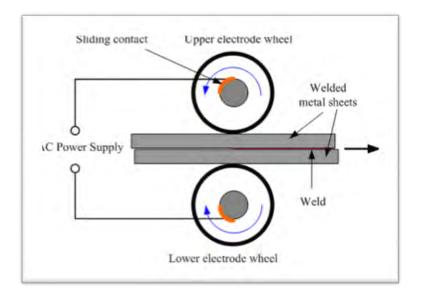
Seam Welding Process (Dmitri Kopeliovich, 2012)
